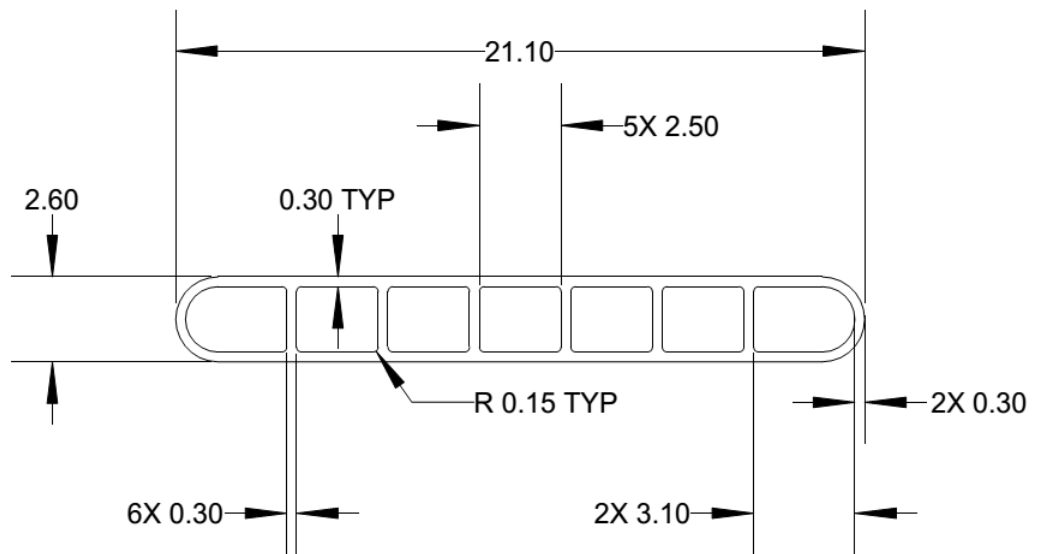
Copper minichannel tube design #3. Dimensions in millimeters.
